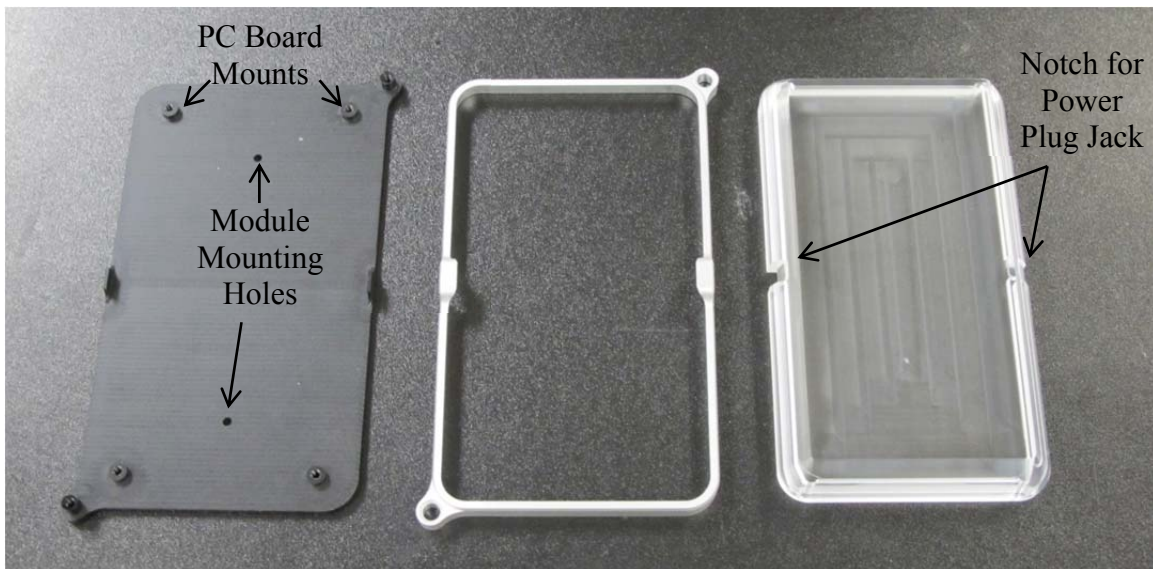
Picture of the lamp module components; from left to right: mounting plate; aluminum frame; lens.
